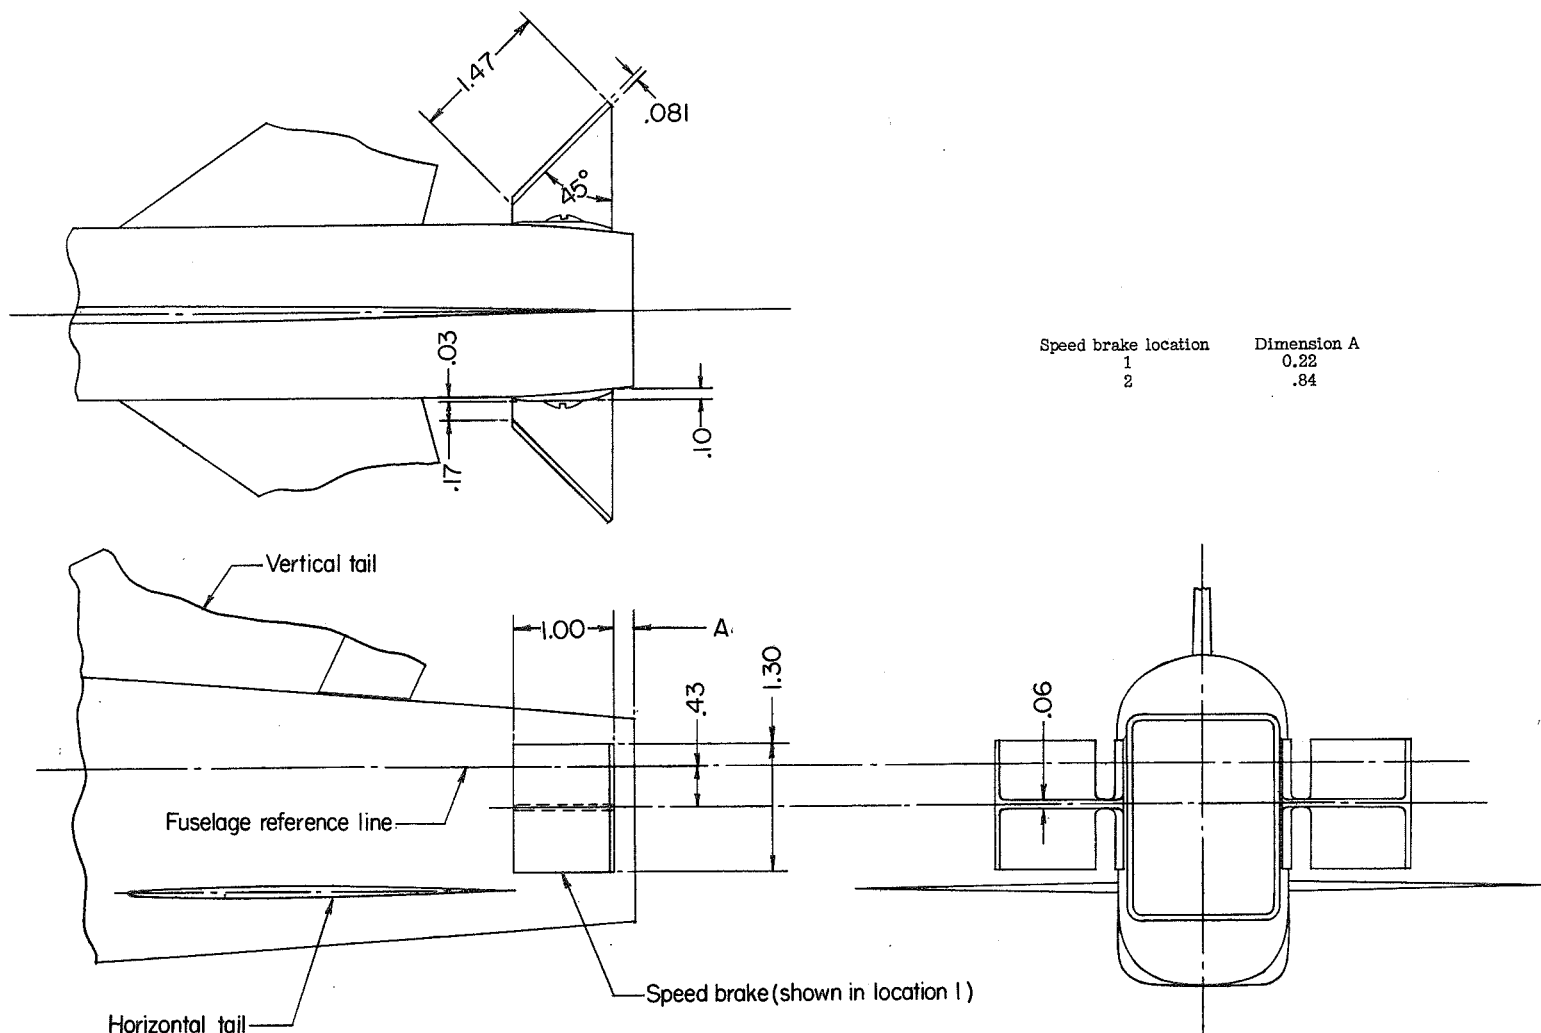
Dimensions of 45° speed brake and location on fuselage. (All dimensions in inches except as noted.)
